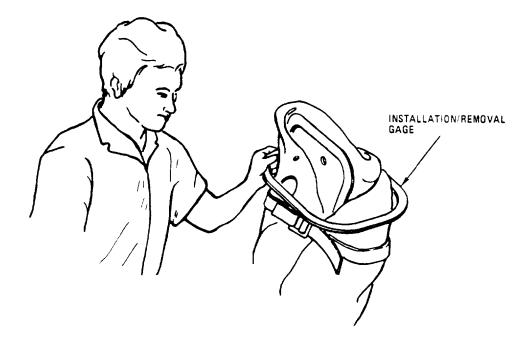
Removal - No. 2 Fuel Tank Folding (Sheet 11)
